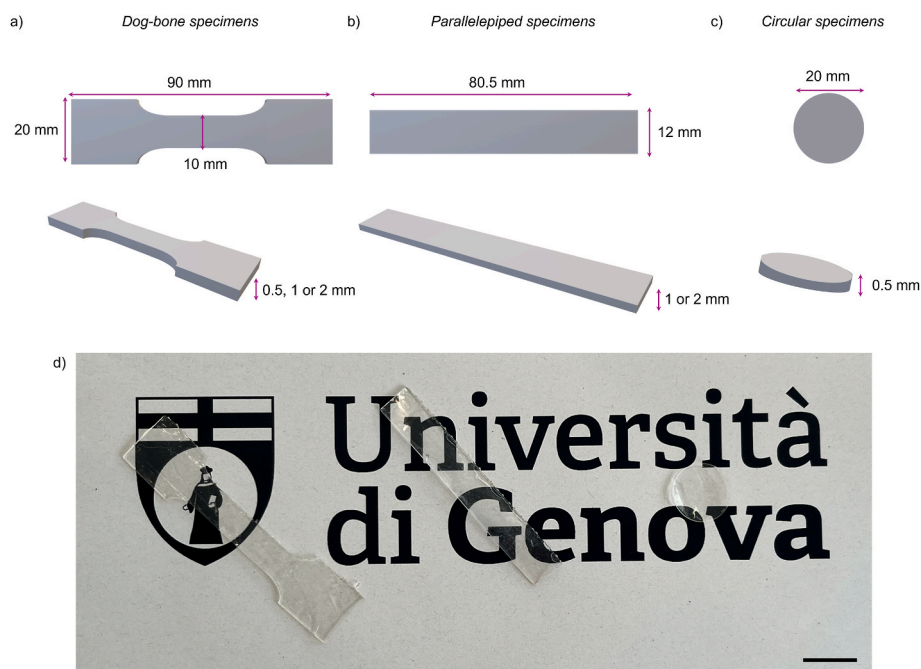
Schematics and dimensions of a) dog-bone, b) parallelepiped, and c) circular test specimens. d) A photograph of samples of different shapes fabricated with the Clear A resin. Scale bar = 2 cm.
